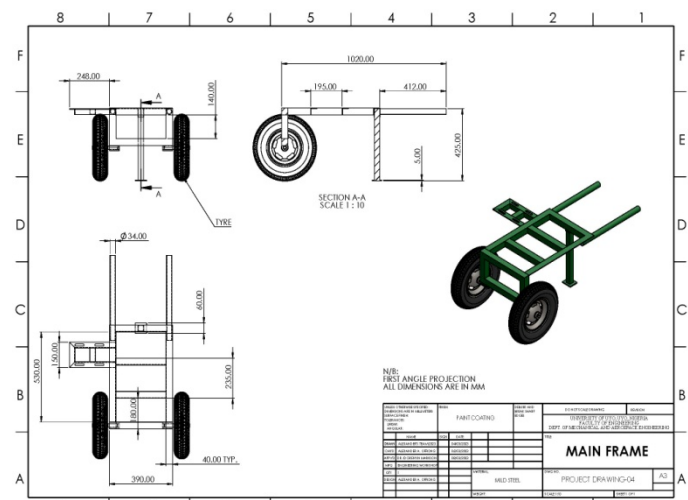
Components drawing the palm kernel nut cracking machine [Main Frame]
